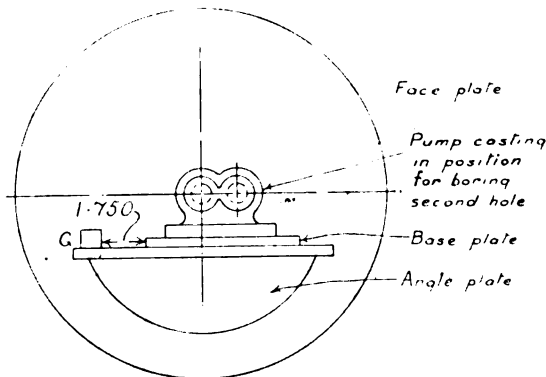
SHOWING METHOD OF MACHINING SMALL PUMP CASTING.
